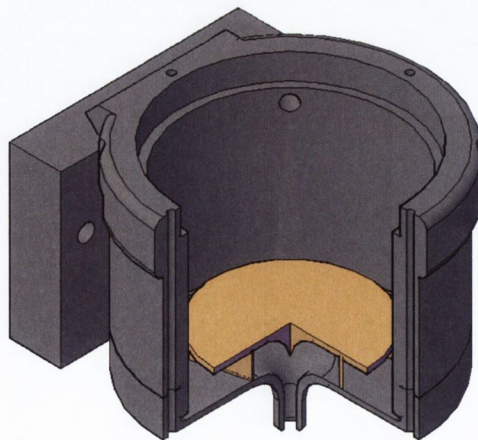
Cross-section of full jet assembly including swirl generator “ L_{no} ”
